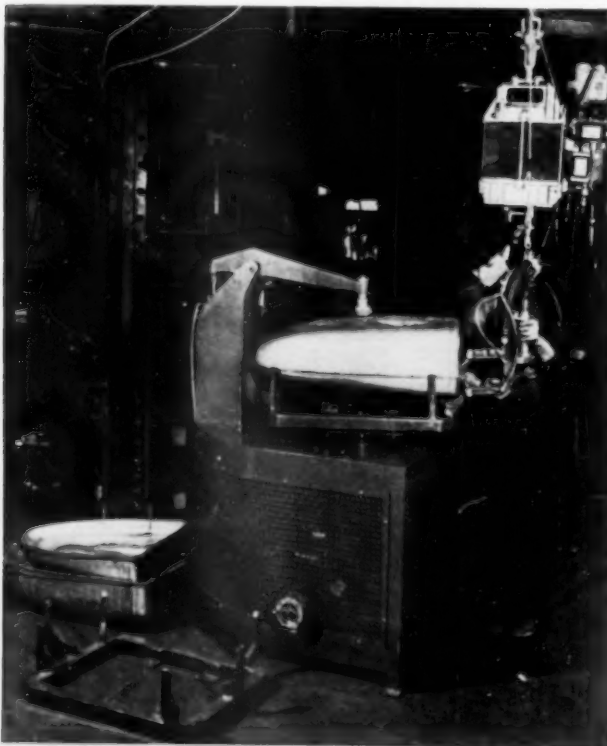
Fixture for holding and locating edges of round container for welding straight seam.
